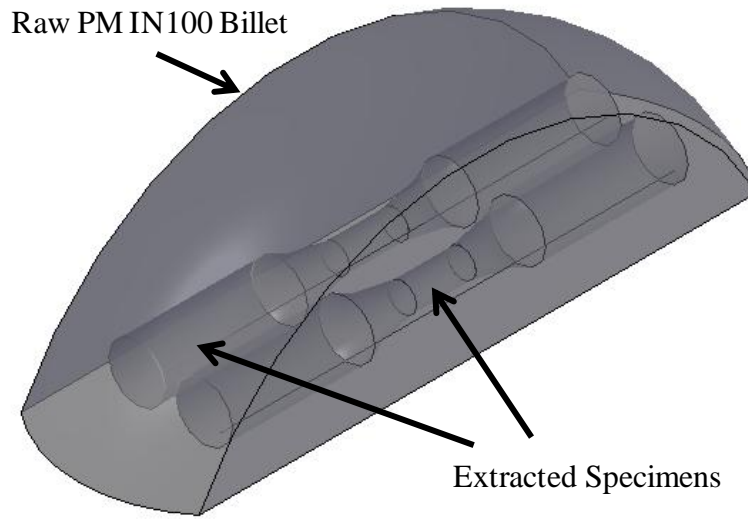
3D model of billet 6 of the IN100 raw material showing the two fatigue specimens that can be produced from billet 6.
